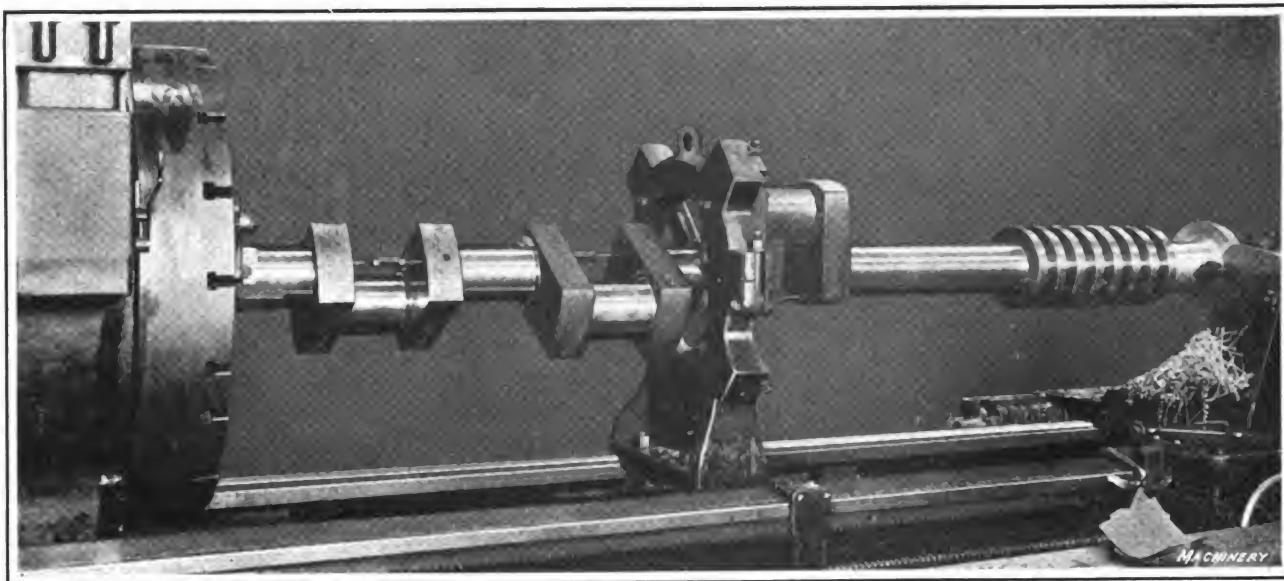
Finishing the Skandia crankshaft journals after completing the turning operations on the crankpins
